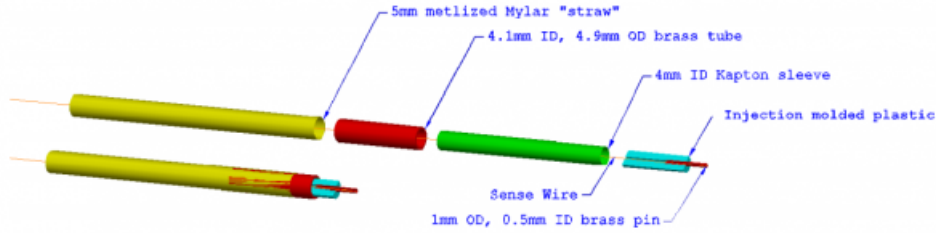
Straw termination, shown exploded and assembled. The brass tube connects to the straw with silver epoxy. The green insulator slips inside a brass tube (red) to prevent breakdown near the tube end. The sense wire is soldered into the brass pin, and epoxied to the injection molded plastic. After assembly the brass tube allows connection to the cathode while the brass pin allows connection to the anode.
